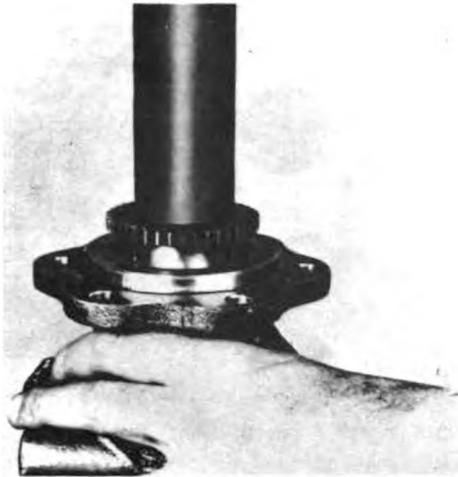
(N20808). Install The Drive Gear Onto The Shaft.
